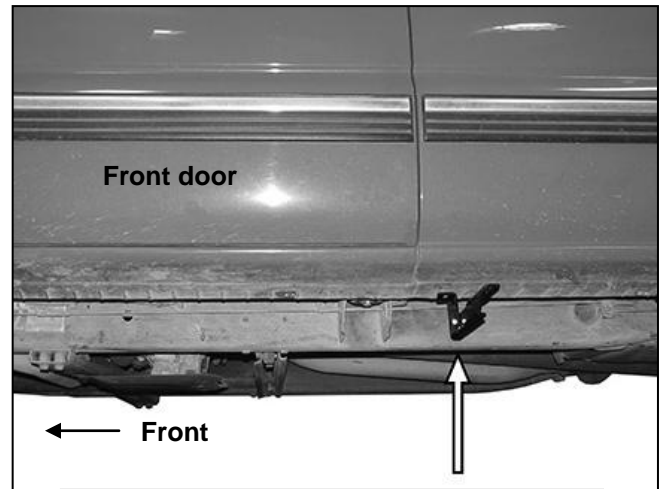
B) Driver/left front and/or center Mounting Bracket and Support Bracket
